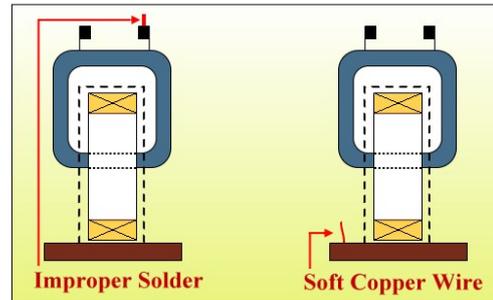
Improper Solder on High-Voltage Side and Improper Soft Wire on Grounding Panel
